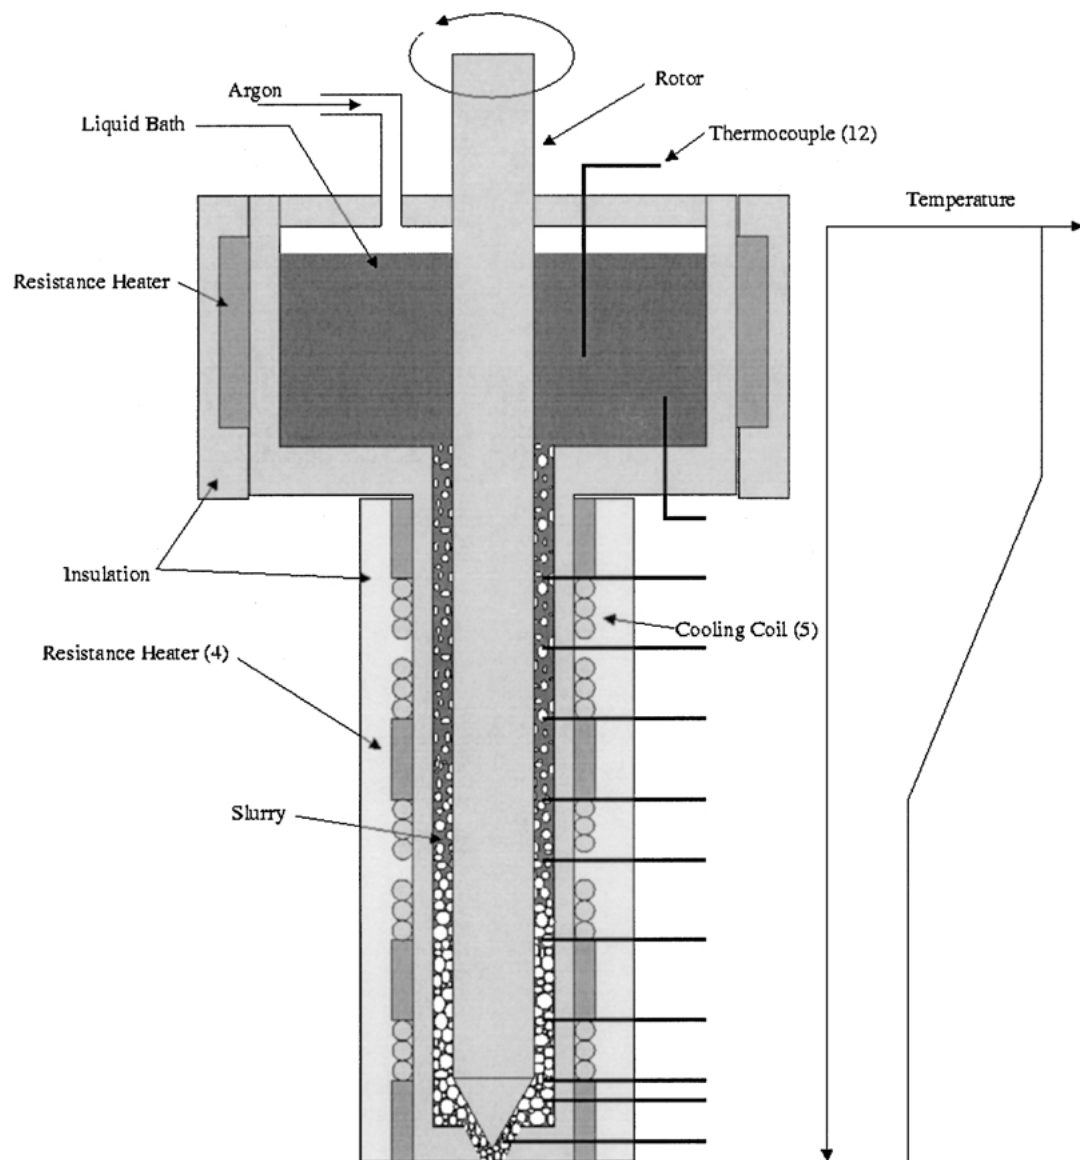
Machine used to produce semi-solid slurry for solid freeform fabrication [3].
